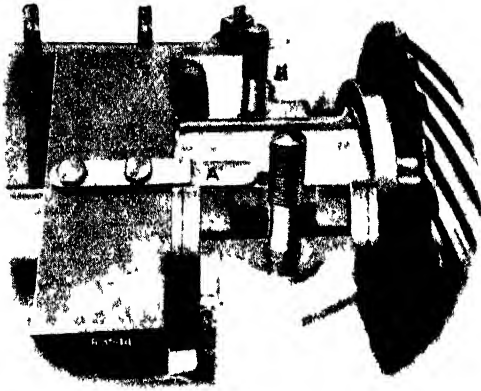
TOOL FOR REMOVING AND REPLACING CRANKSHAFT BEARINGS
